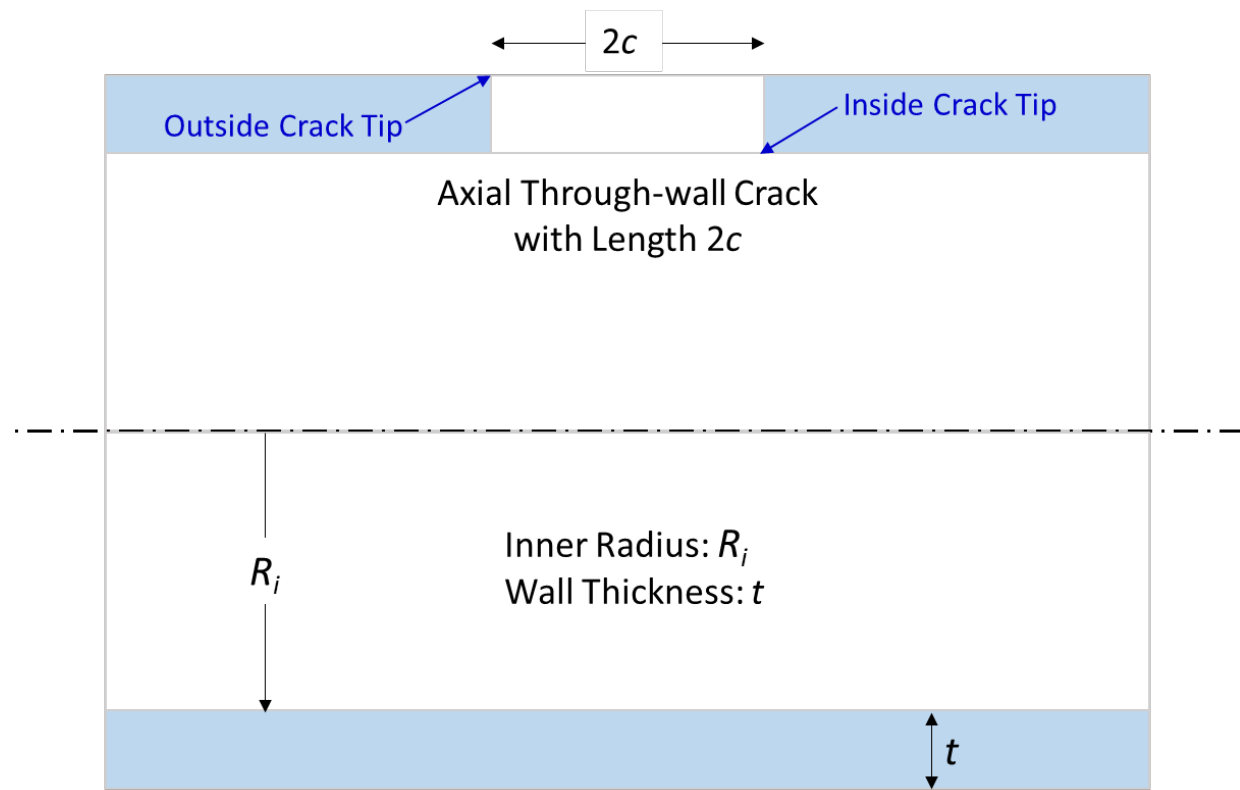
Sketch of an axial through-wall crack in a cylinder
